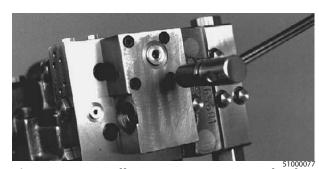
Install E1-E2 or F1-F2 Control Valve Housing
